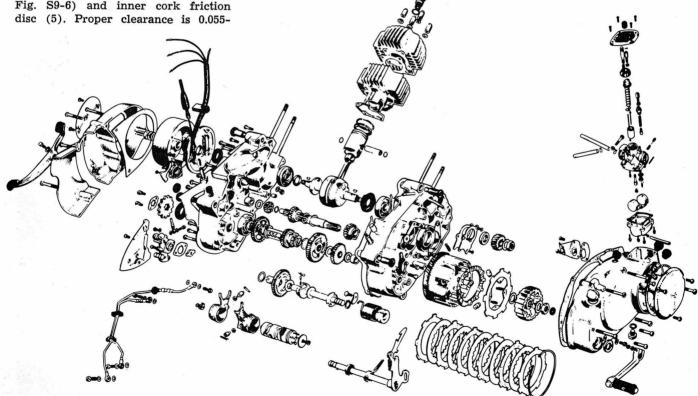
Exploded view of engine assembly used in F 50 and F 50 R models.
